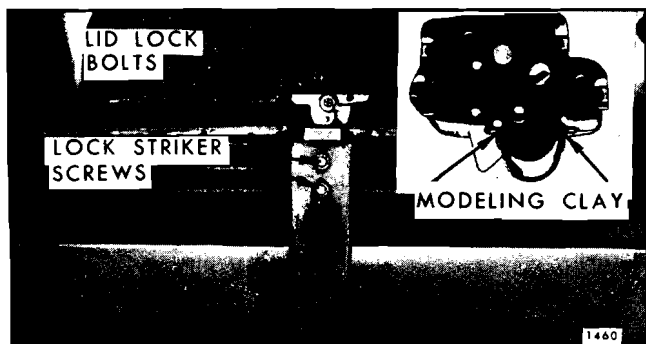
Rear Compartment Lid Lock Assembly -
